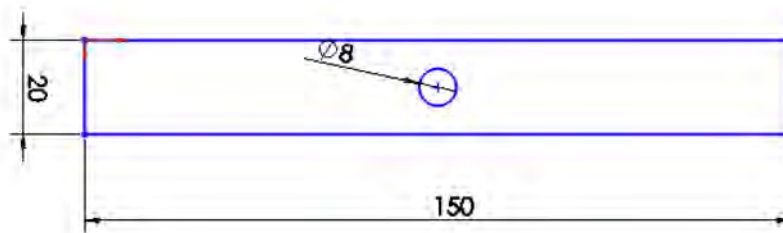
Dimension of tension test perforated specimens. All dimensions in millimeters.
